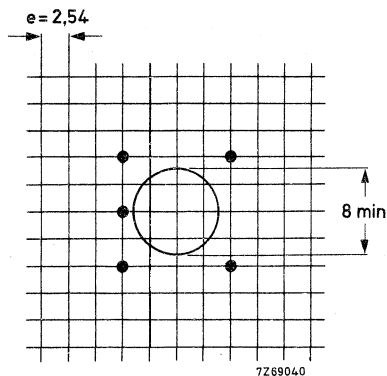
Hole pattern for mounting on a printed-wiring board, hole dia $1,3 + 0,1$ mm
